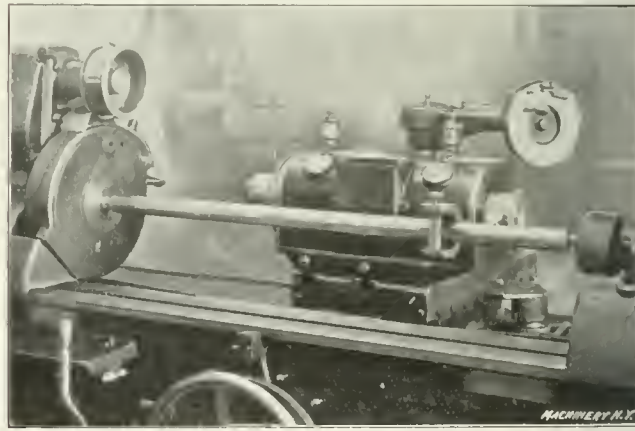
Testing Wheel Spindle Alignment on Plain Machine
